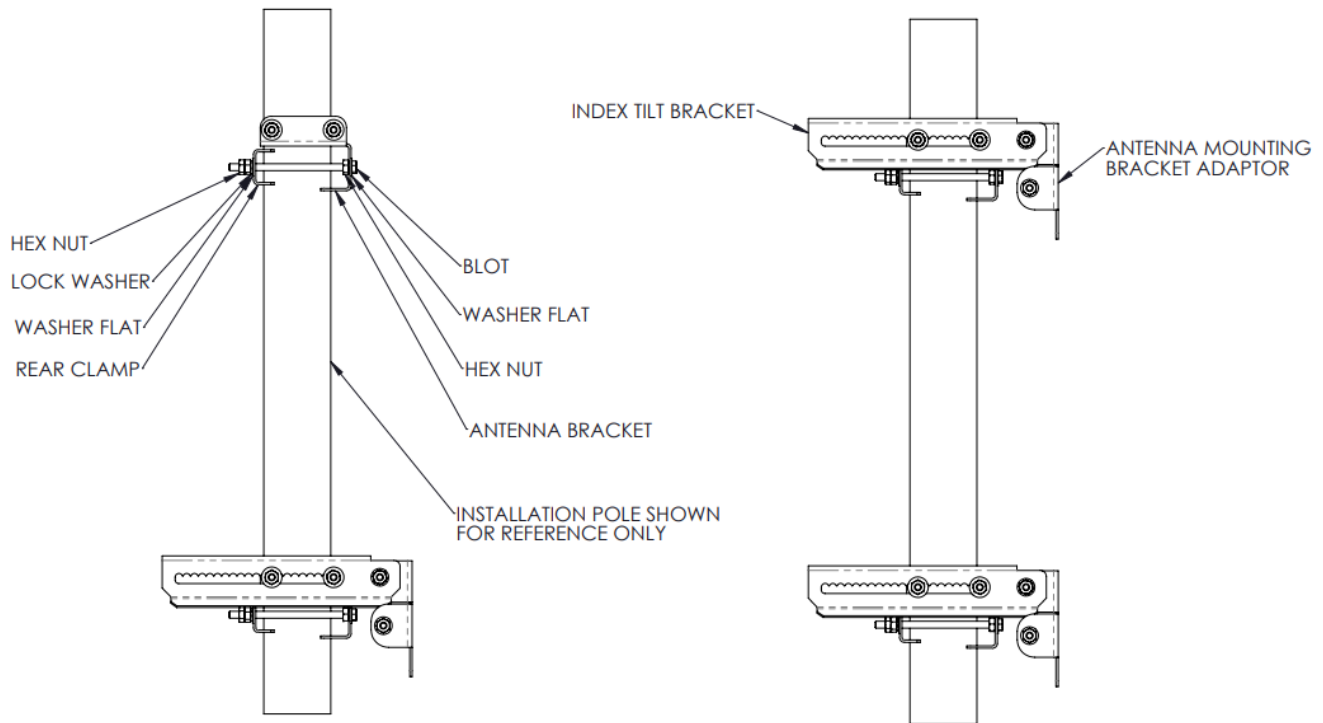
Mounting bracket to pole installation - SIDE VIEW
